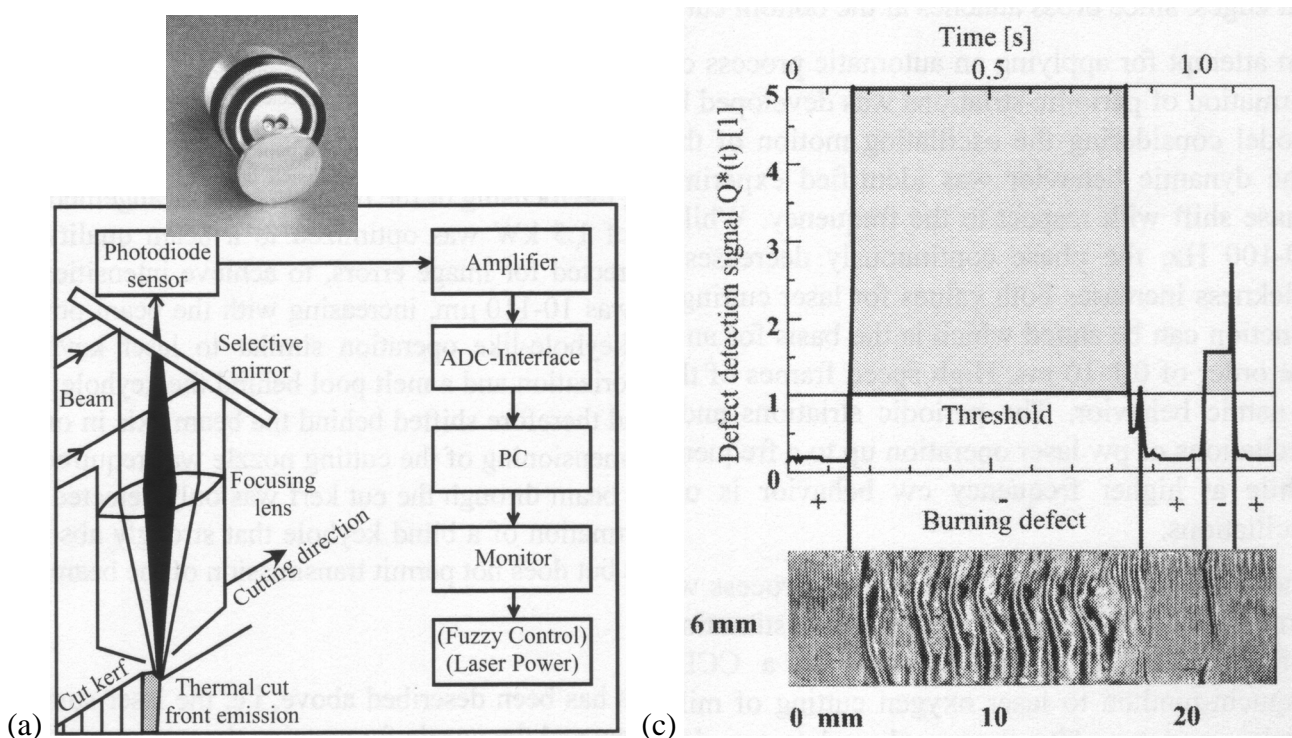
Typical process monitoring system for laser processing (here: laser cutting): (a) system set-up with optical sensor detecting (b) quality defects (here: burning) through signal correlation
